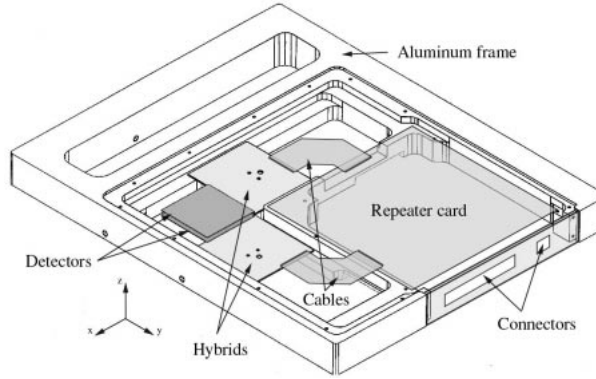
Three-dimensional view of the open telescope module without electronics, showing the detectors, the hybrids and the space for cables and repeater card (see also fig. 2).
